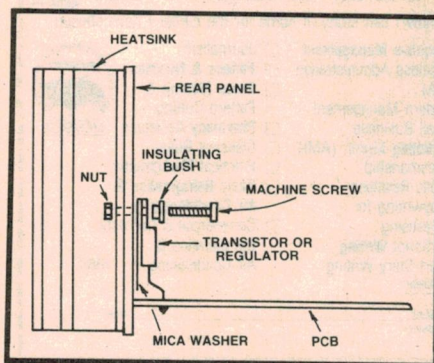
how the heatsink assembly goes together. Use your multimeter to check that the output devices are correctly insulated.
